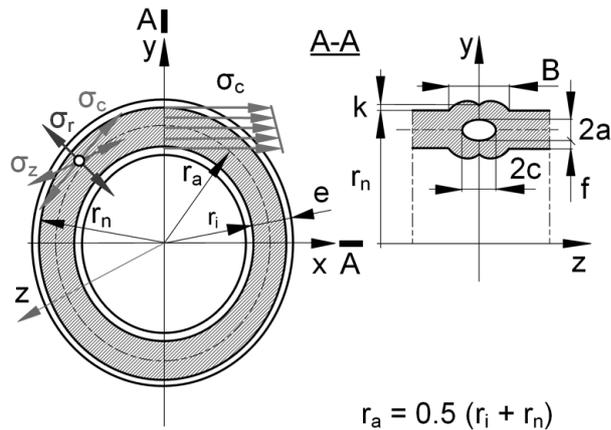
Cross-section of the butt welded joint of pipes with a longitudinal internal elliptical fissure; r_n – external radius of a pipe, r_a – average pipe radius, r_i – internal pipe radius, e – pipe wall thickness, σ_z – longitudinal stress, σ_r – radial stress, σ_c – circumferential stress, k – groove height between weld beds, B – joint width, a – vertical semi-axis of an elliptical defect, c – horizontal semi-axis of an elliptical defect, f – minimal distance between the fissure front and pipe surface
